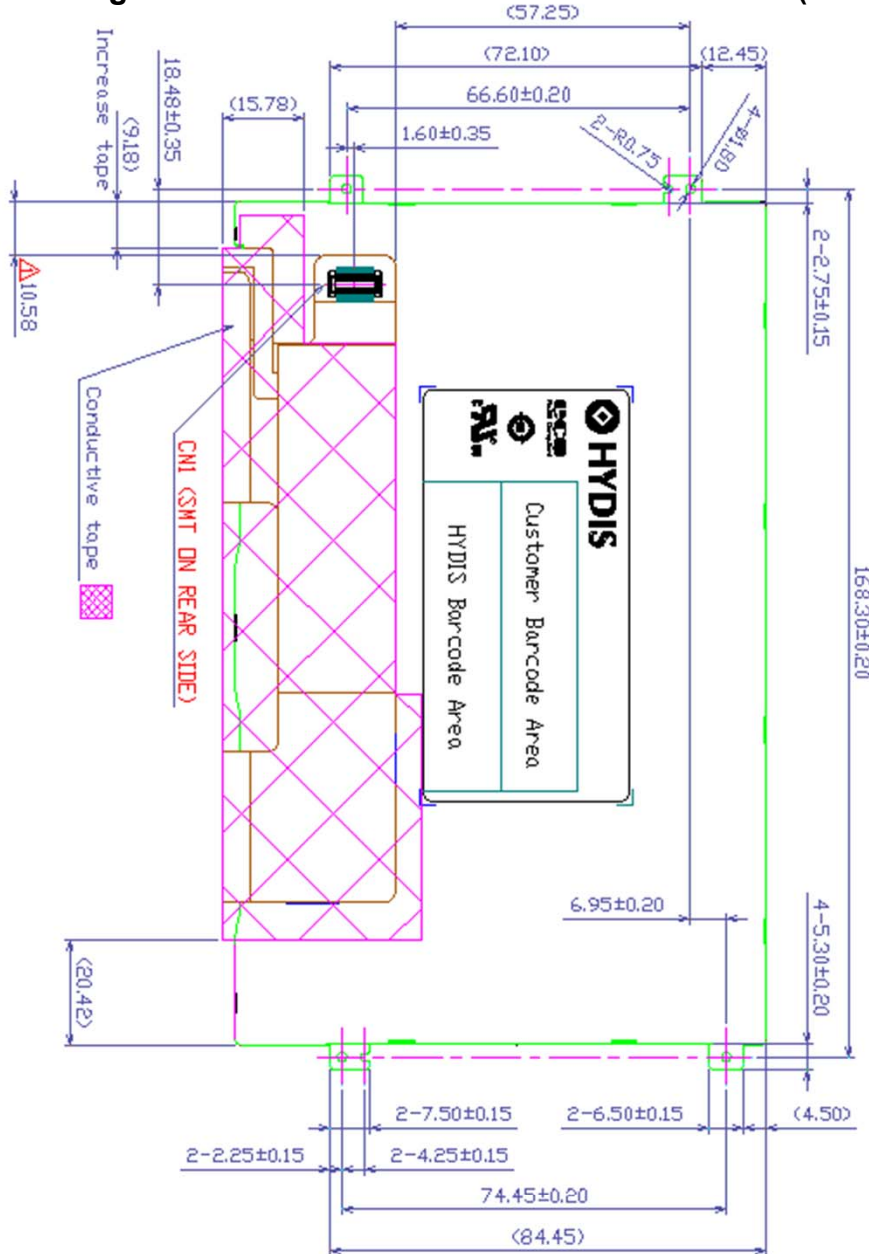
TFT-LCD Module Outline Dimension (Front View)
